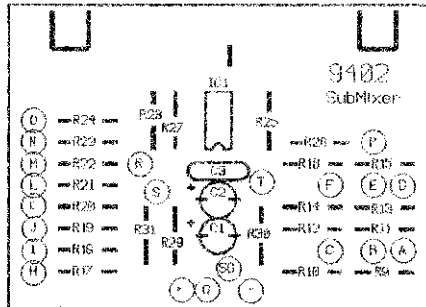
Components mount on the circuit board in the locations shown in this parts placement drawing
